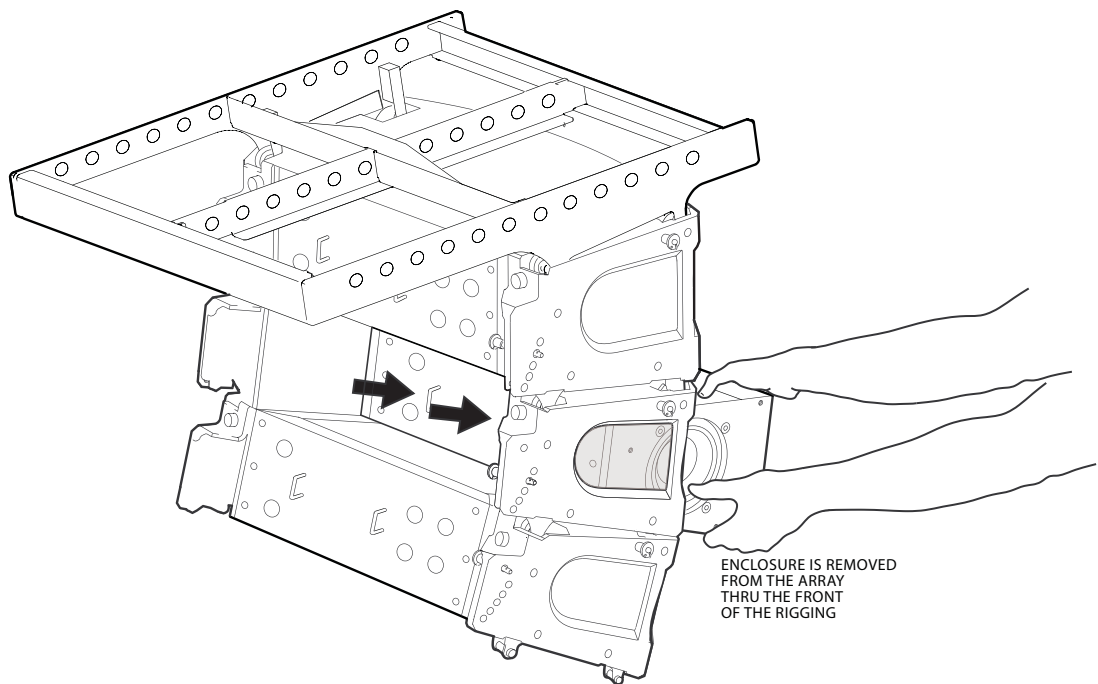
Remove and Replace Enclosure From the NTL720 Hanging Array
